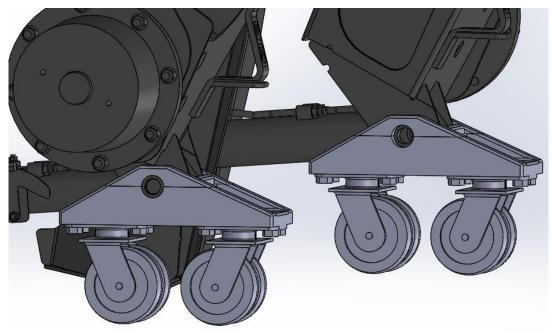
Front wheel assemblies installed on the front wheel axles of the tractor.
